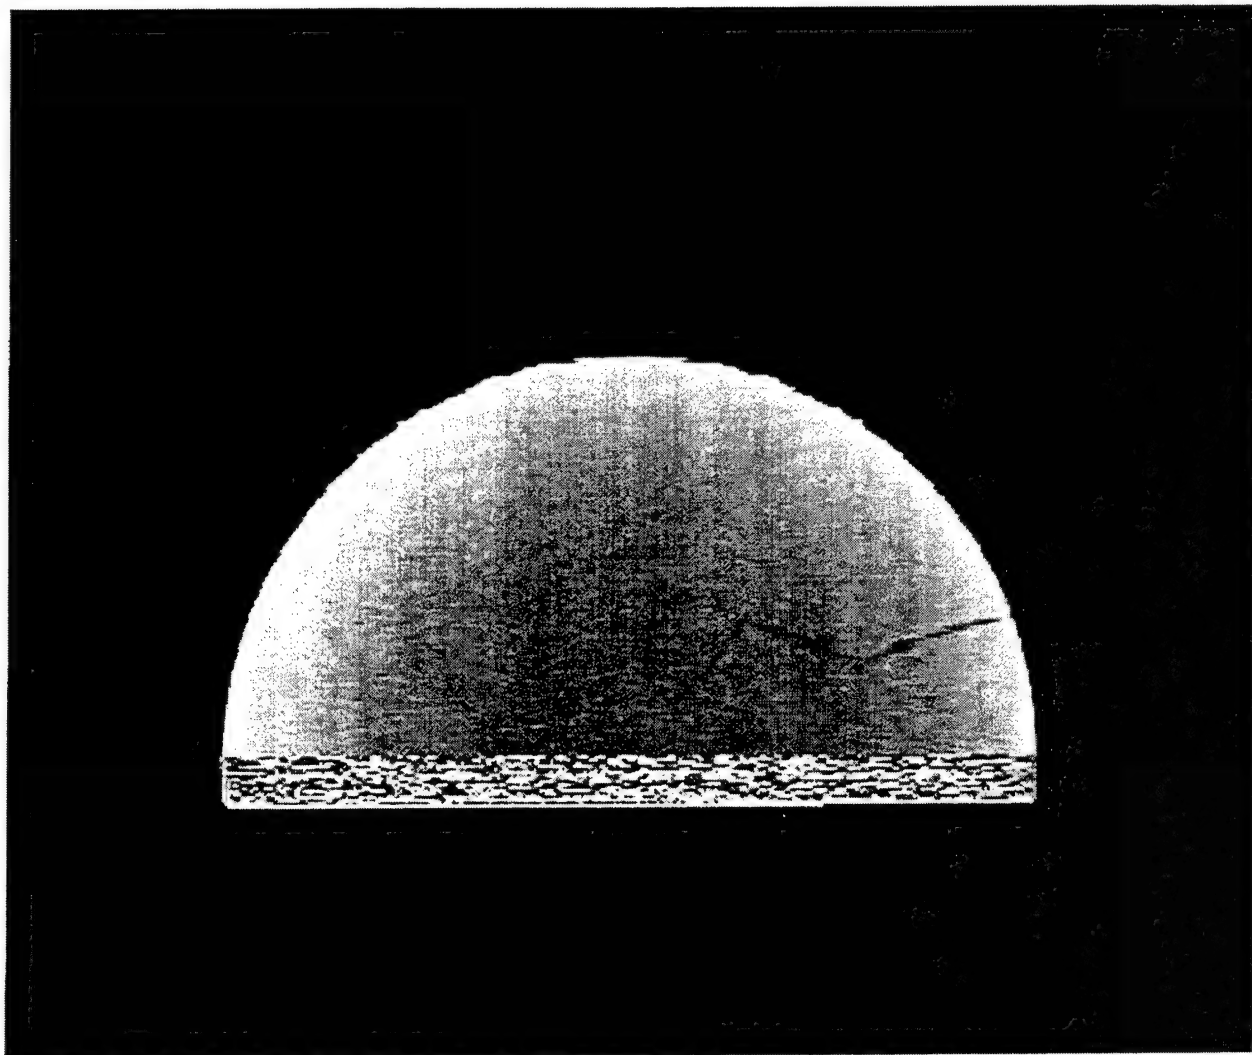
9.68 mm from bottom of disk with 65° rotation about X-axis.
